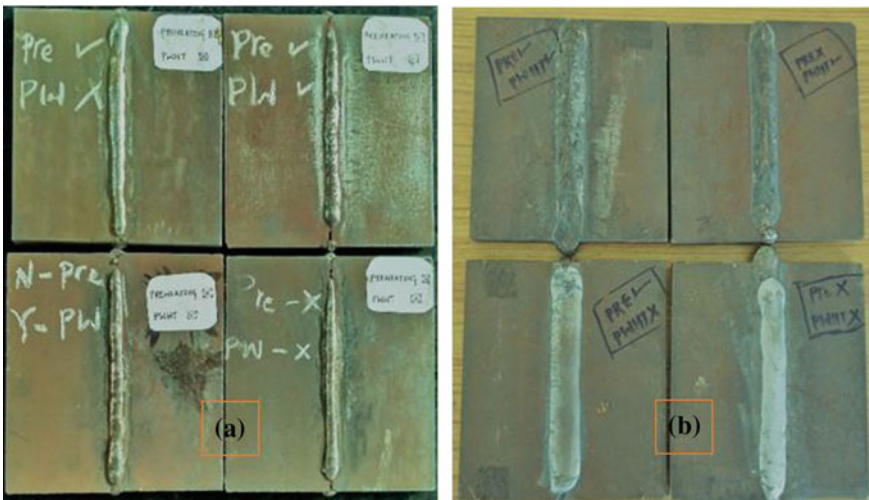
a Single-sided weld joints (bottom surface) and b double-sided weld joints (bottom surface)
